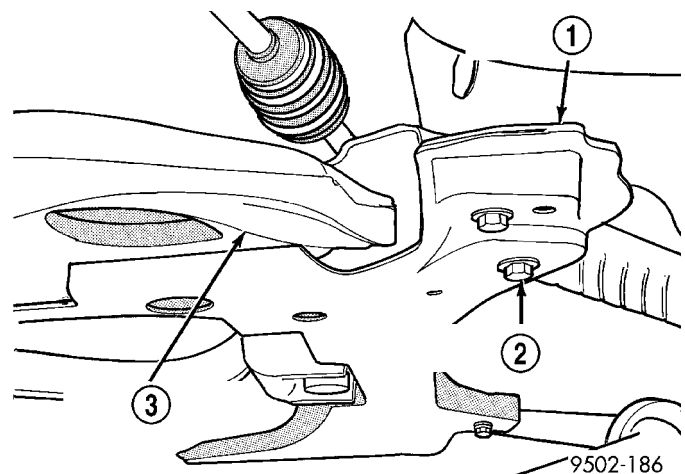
Lower Control Arm Attachment To Front Suspension Crossmember
